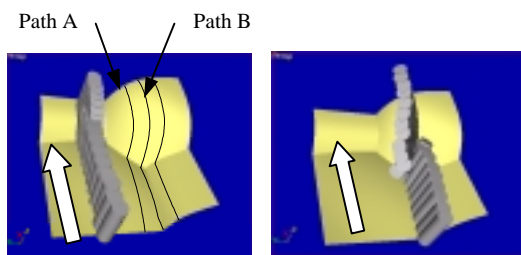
Examples of tool paths for sculptured surface machining (a) Tool path generation for machining a surface, (b) Machining of an example turbine blade
